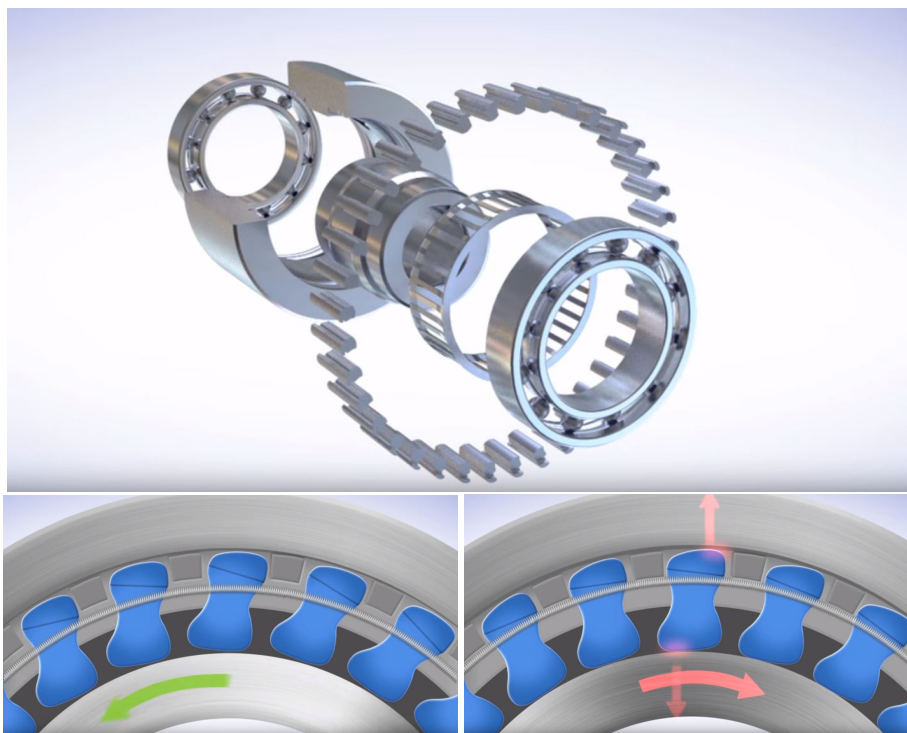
Spraug bearing description that is used in the parallel HEPS. [60]
